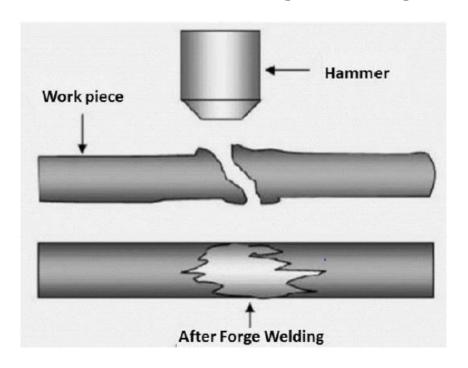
Schematic representation of forge welding using hammer
